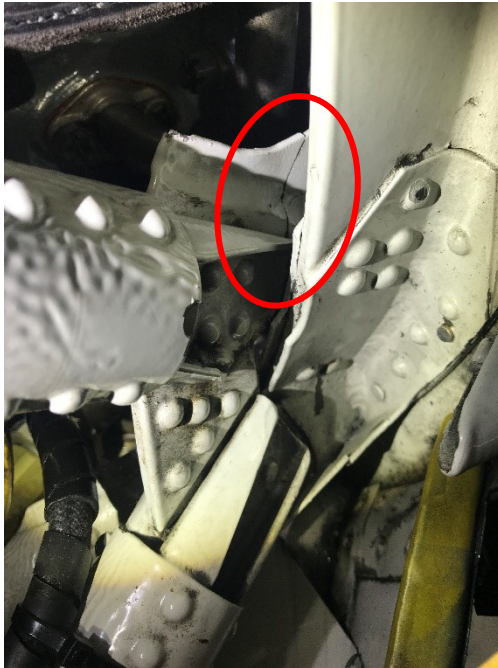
Crack in the mounting frame gusset plate (red circle). Photograph provided by Ju-Air.
